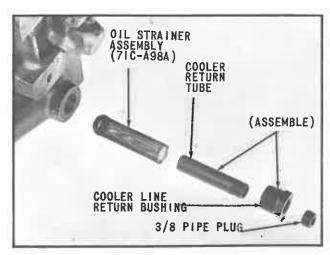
Installation of Oil Strainer with Cooler Return bushing Assembly
